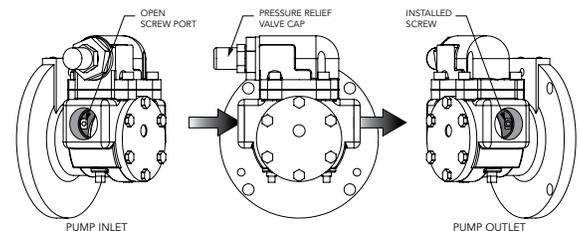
Modular DLV oil pump assembly. Note that the pressure relief valve cap must always point toward the inlet side of pump. Screw is installed on outlet side of pump.
